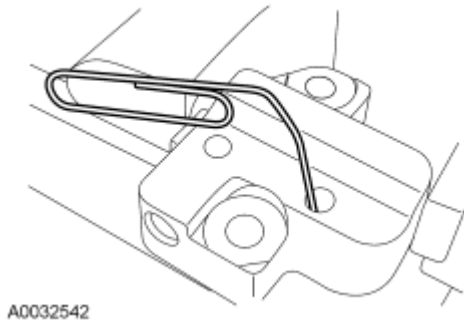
Using A Small Pick To Push Back And Hold Ratchet Mechanism
